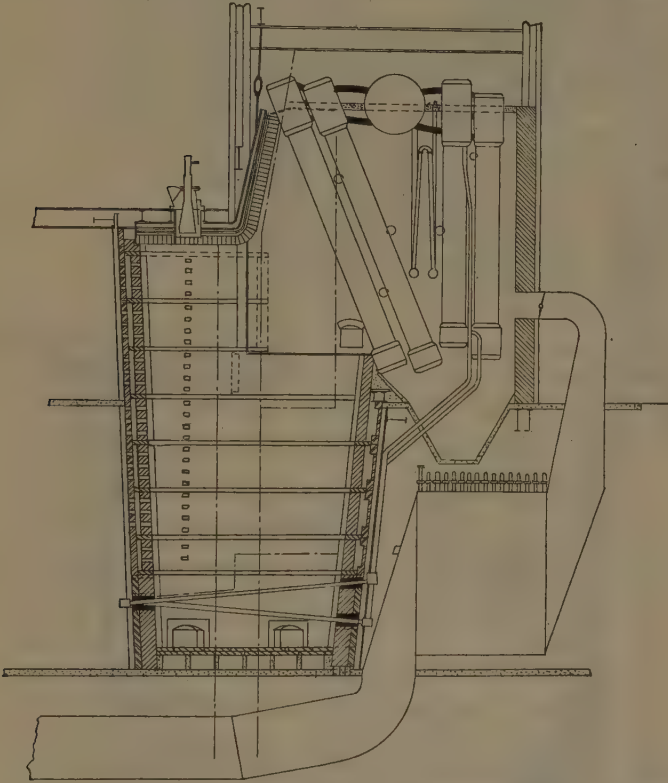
BIGELOW-HORNSBY BOILER, 8750 SQ. FT. OF HEATING SURFACE.
